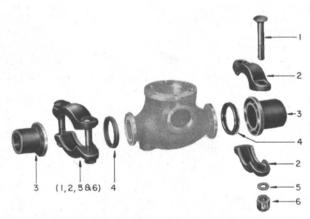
No. 1120 FF Clamp Ring Union Assembly
